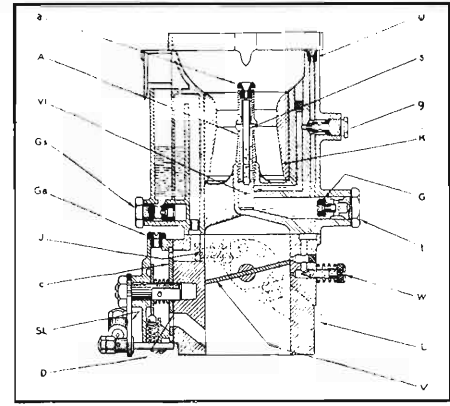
BI-STARTER & MAIN CARBURETTOR
